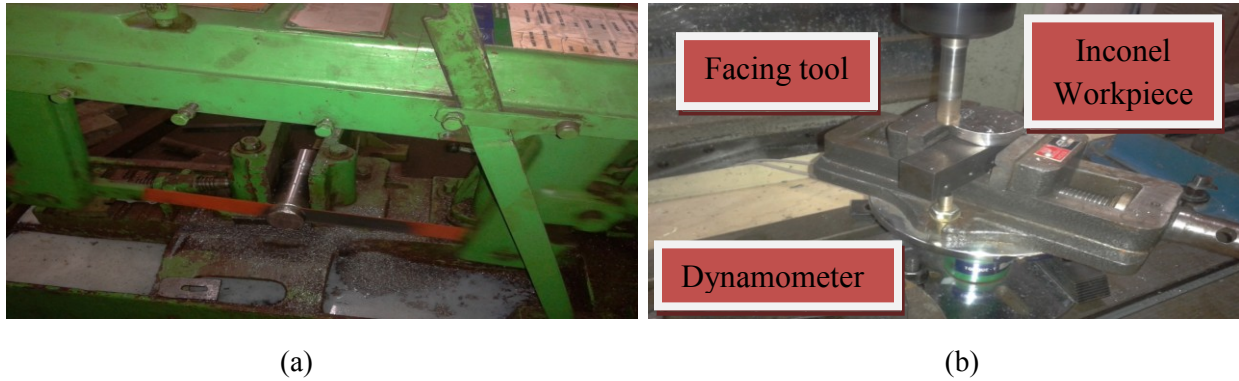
(a) Cutting of parent stock using power hacksaw (b) Facing of the Inconel in CNC milling m/c
